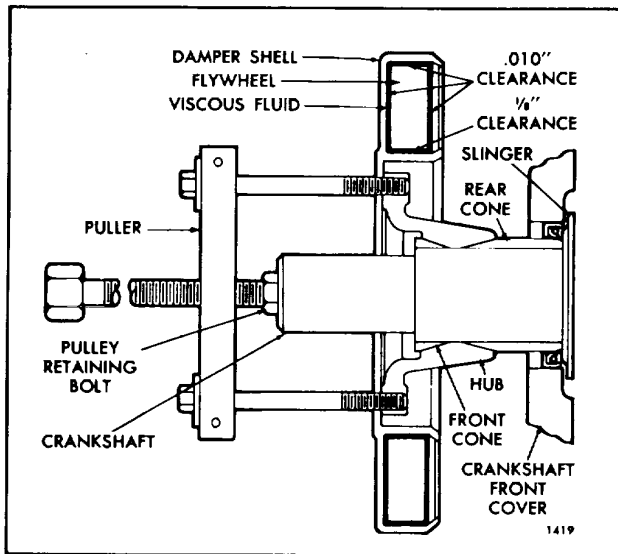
Removing Vibration Damper Assembly (Viscous Type)
